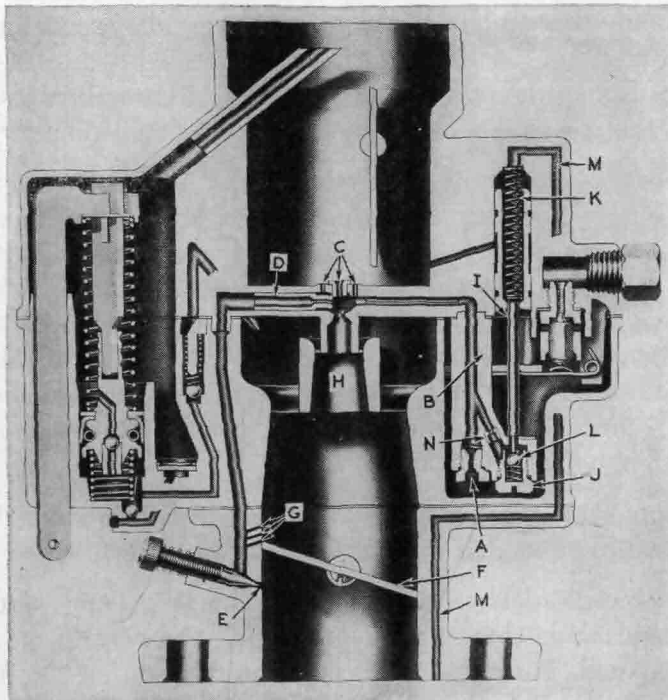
Sectional view of late-model single-barrel carburetor. (*Chevrolet Motor Division of General Motors Corporation*)
